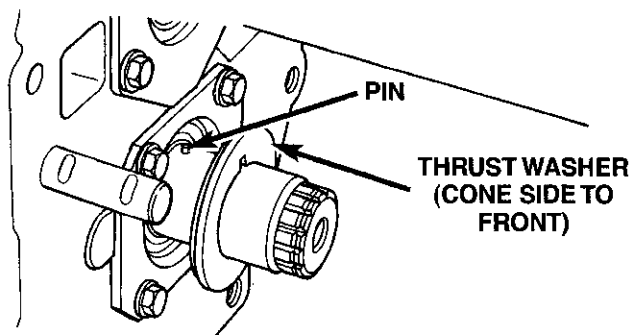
Installing Fifth Gear Thrust Washer Pin
